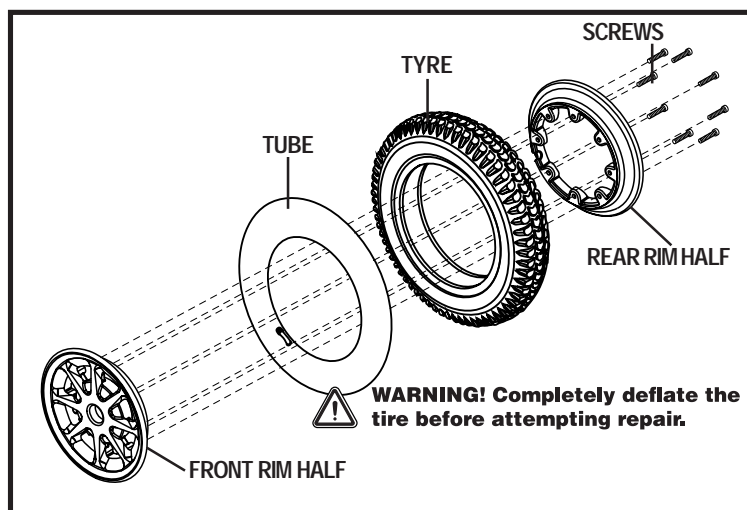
Jazzy 1170XL Drive Wheel Disassembled
